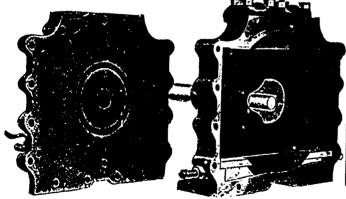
Dake Engine, Showing Piston with Cylinder Cover Removed.
